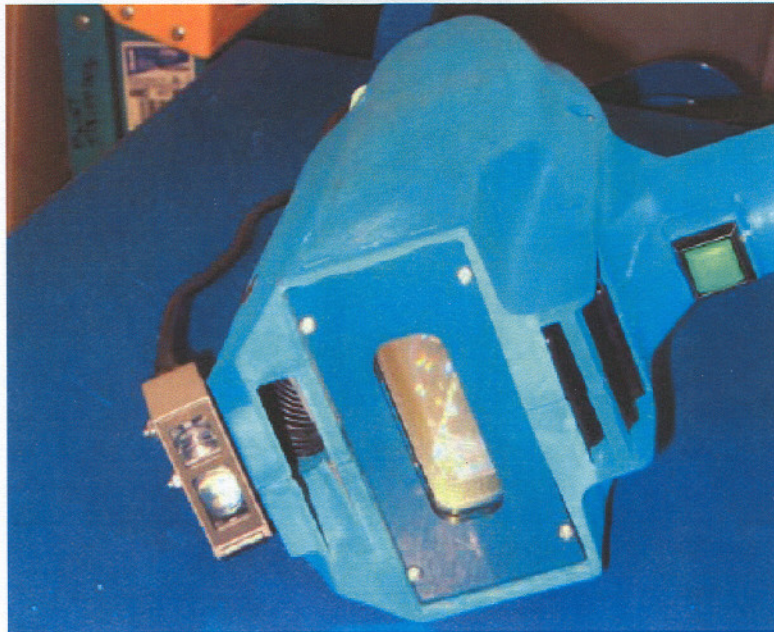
Laser head with nozzle removed. (Not operational configuration)
